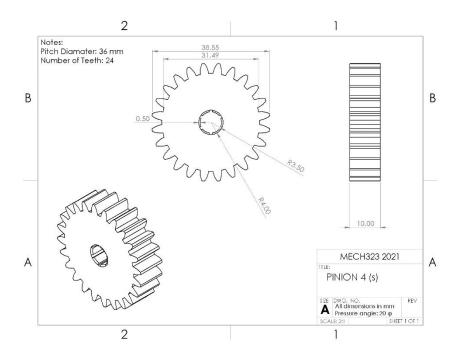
CAD drawing for the final design of Pinion 4 (s).
